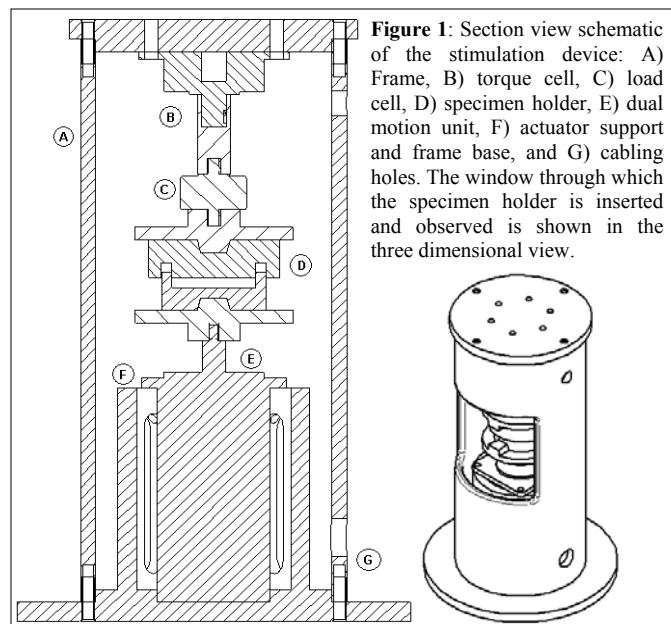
Section view schematic of the stimulation device: A) Frame, B) torque cell, C) load cell, D) specimen holder, E) dual motion unit, F) actuator support and frame base, and G) cabling holes. The window through which the specimen holder is inserted and observed is shown in the three dimensional view.
